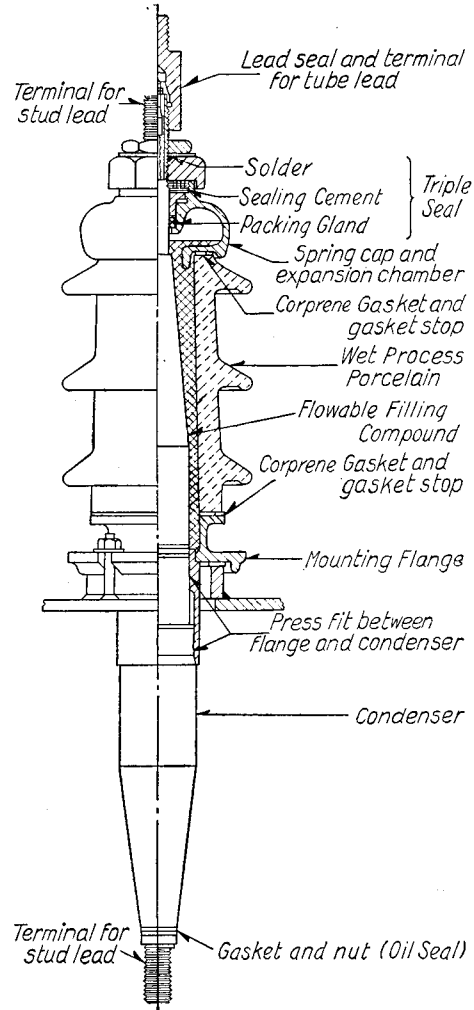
PARTIAL SECTION OF TYPE G CONDENSER BUSHING
